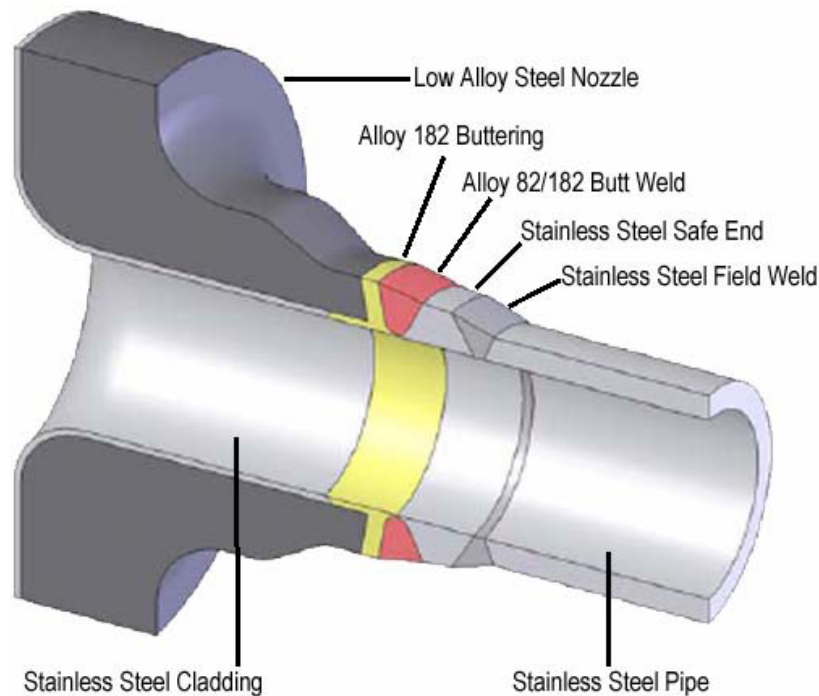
Typical nickel-alloy dissimilar metal weld configuration
